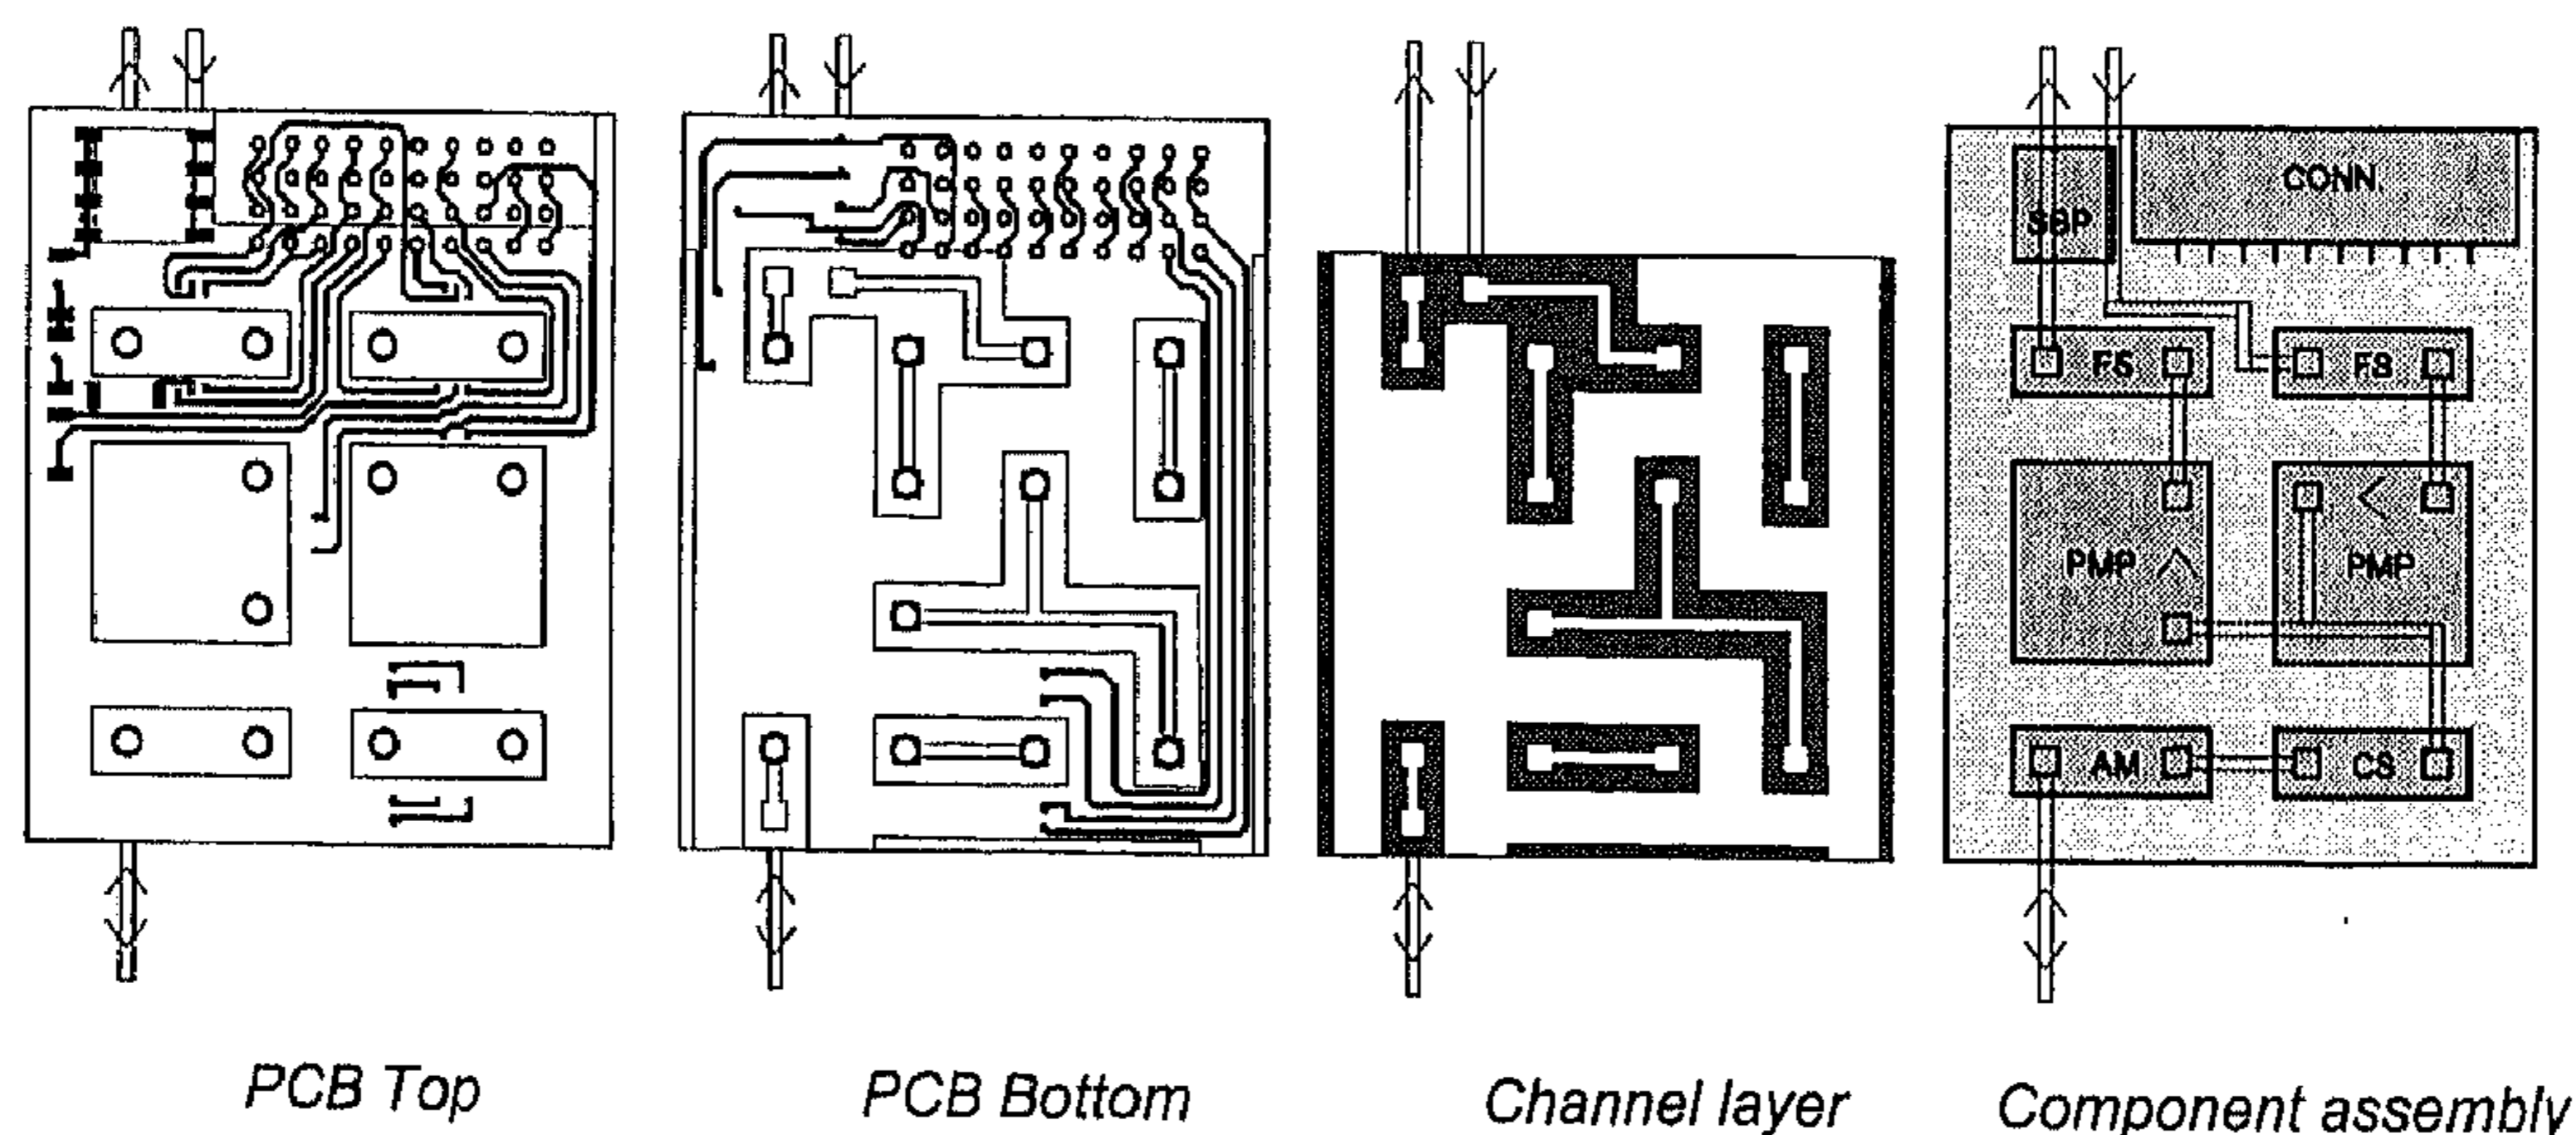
Schematics of floorplan with mixed electrical and fluid connections.
